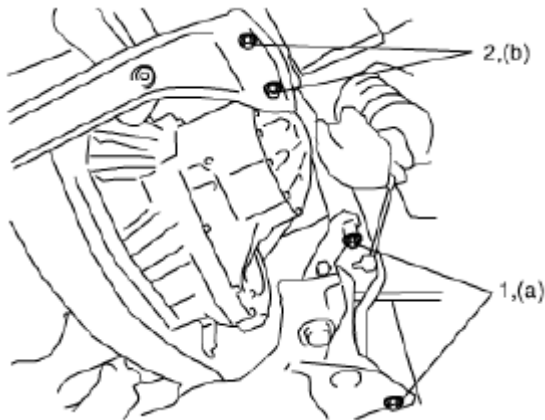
Identifying Suspension Frame Mounting & Front Lower Cross Member Bolts
